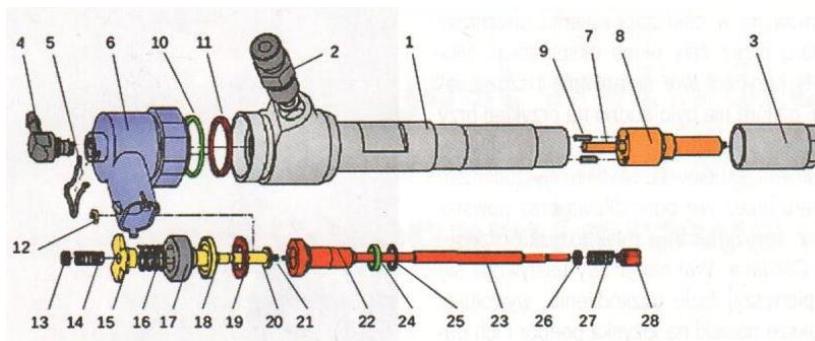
Assembly diagram of the Common Rail electromagnetic injector [16]: 1 - nozzle-holder body, 2 - fuel supply connector, 3 - nozzle retaining nut, 4 - overflow spigot, 5 - clamping saddle, 6 - solenoid coil, 7 - pressure pin , 8 - nozzle body, 9 - locating pins, 10 - gasket, 11 - washer, 12 - cotter, 13 - spring washer, 14 - valve spring, 15 - electromagnet jumper, 16 - spring, 17 - valve guide, 18 - washer, 19 - washer, 20 - valve pusher, 21 - ball guide, 22 - the body of the control chamber, 23 - bucket increaser, 24 - gasket of the control chamber, 25 - washer, 26 - spring washer of the needle, 27 - needle spring, 28 - stem of the needle
